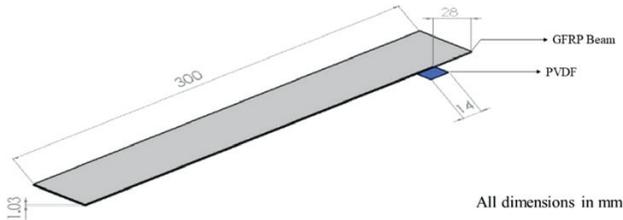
Structural geometry of piezo-enabled GFRP beam structure
